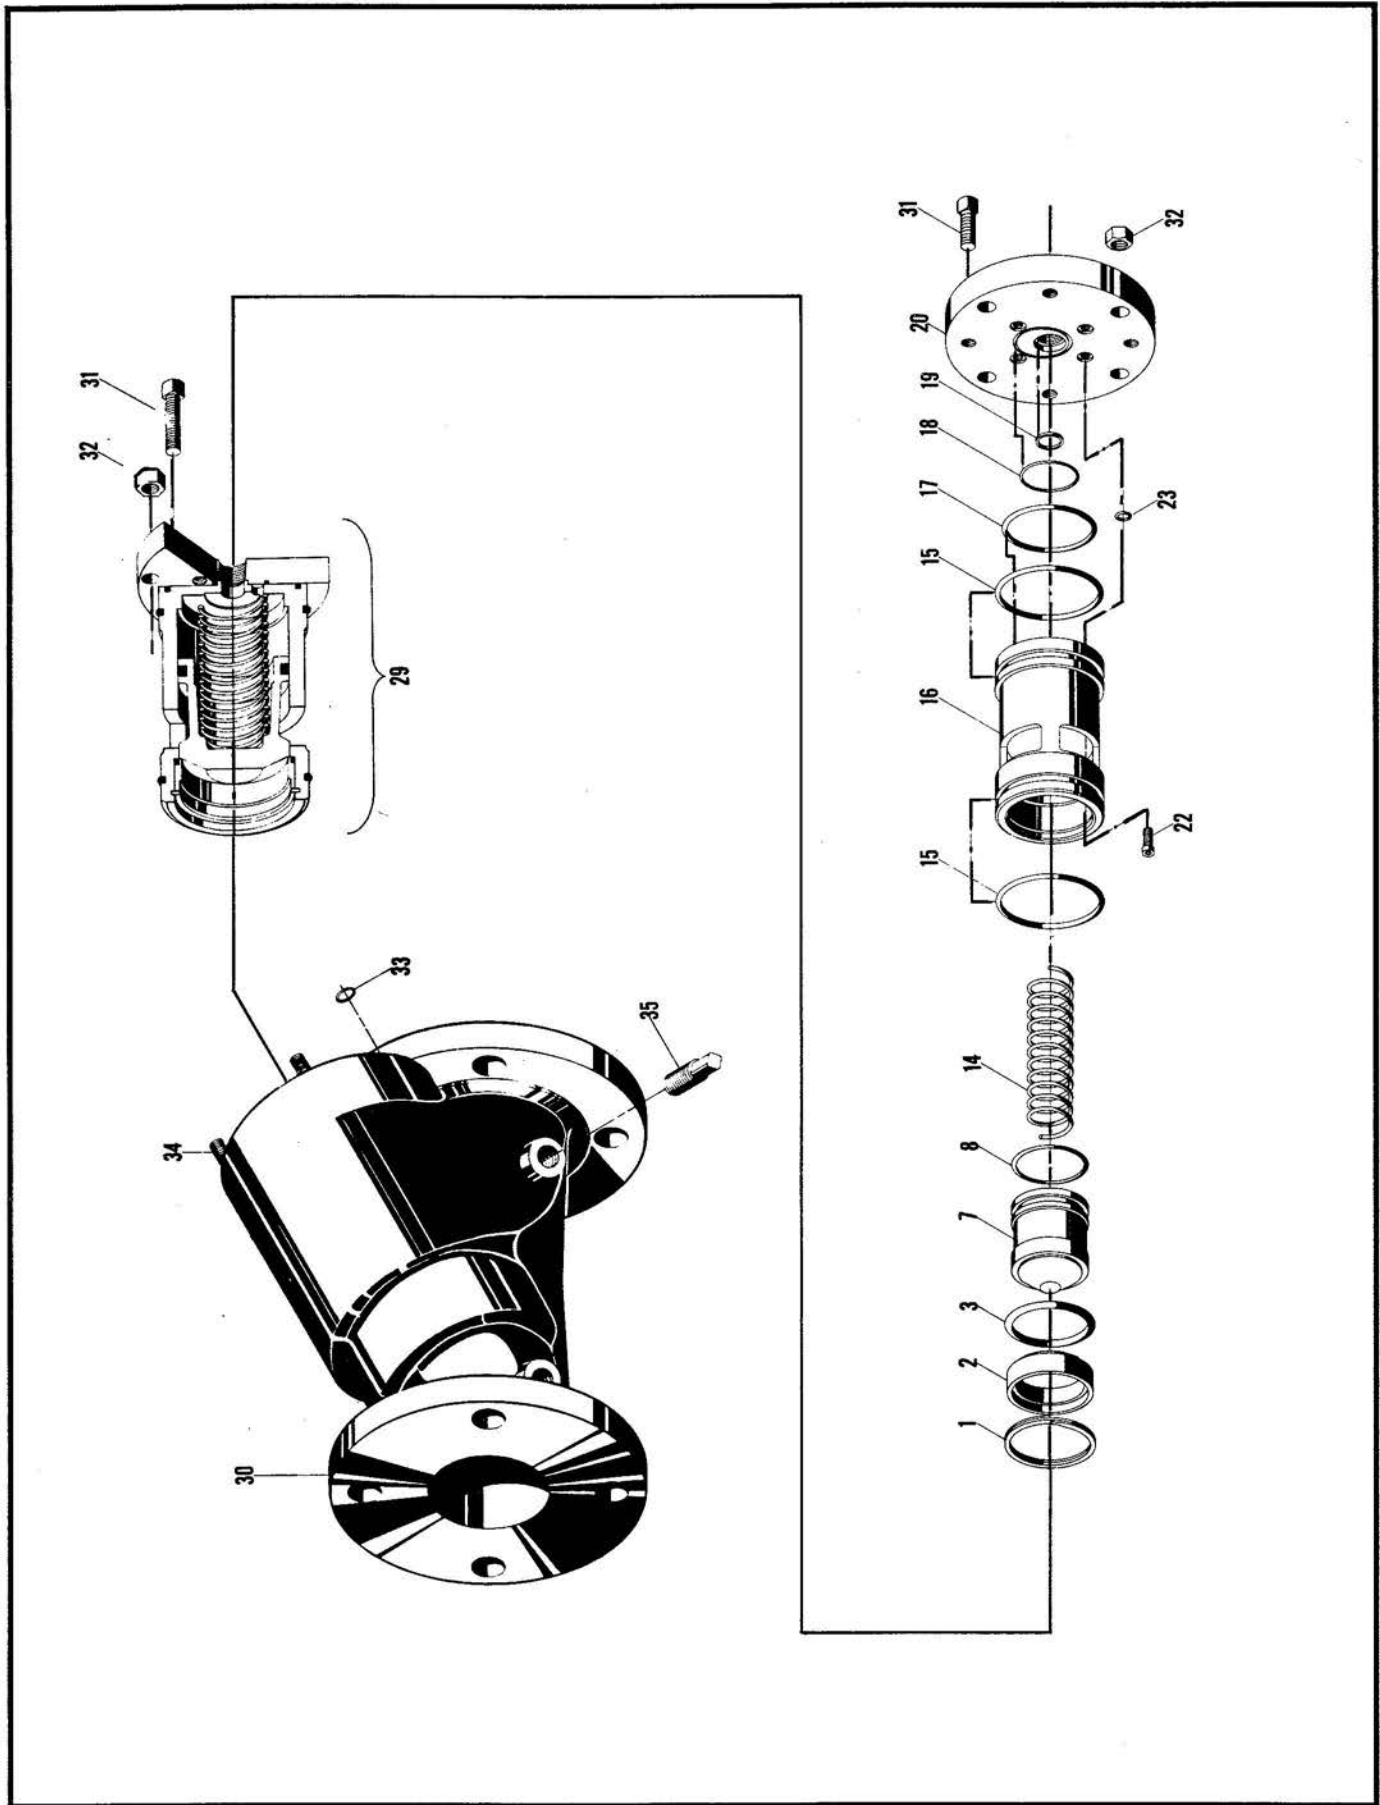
Parts Drawing - Series 700A Control Valves Without Position Indicator
